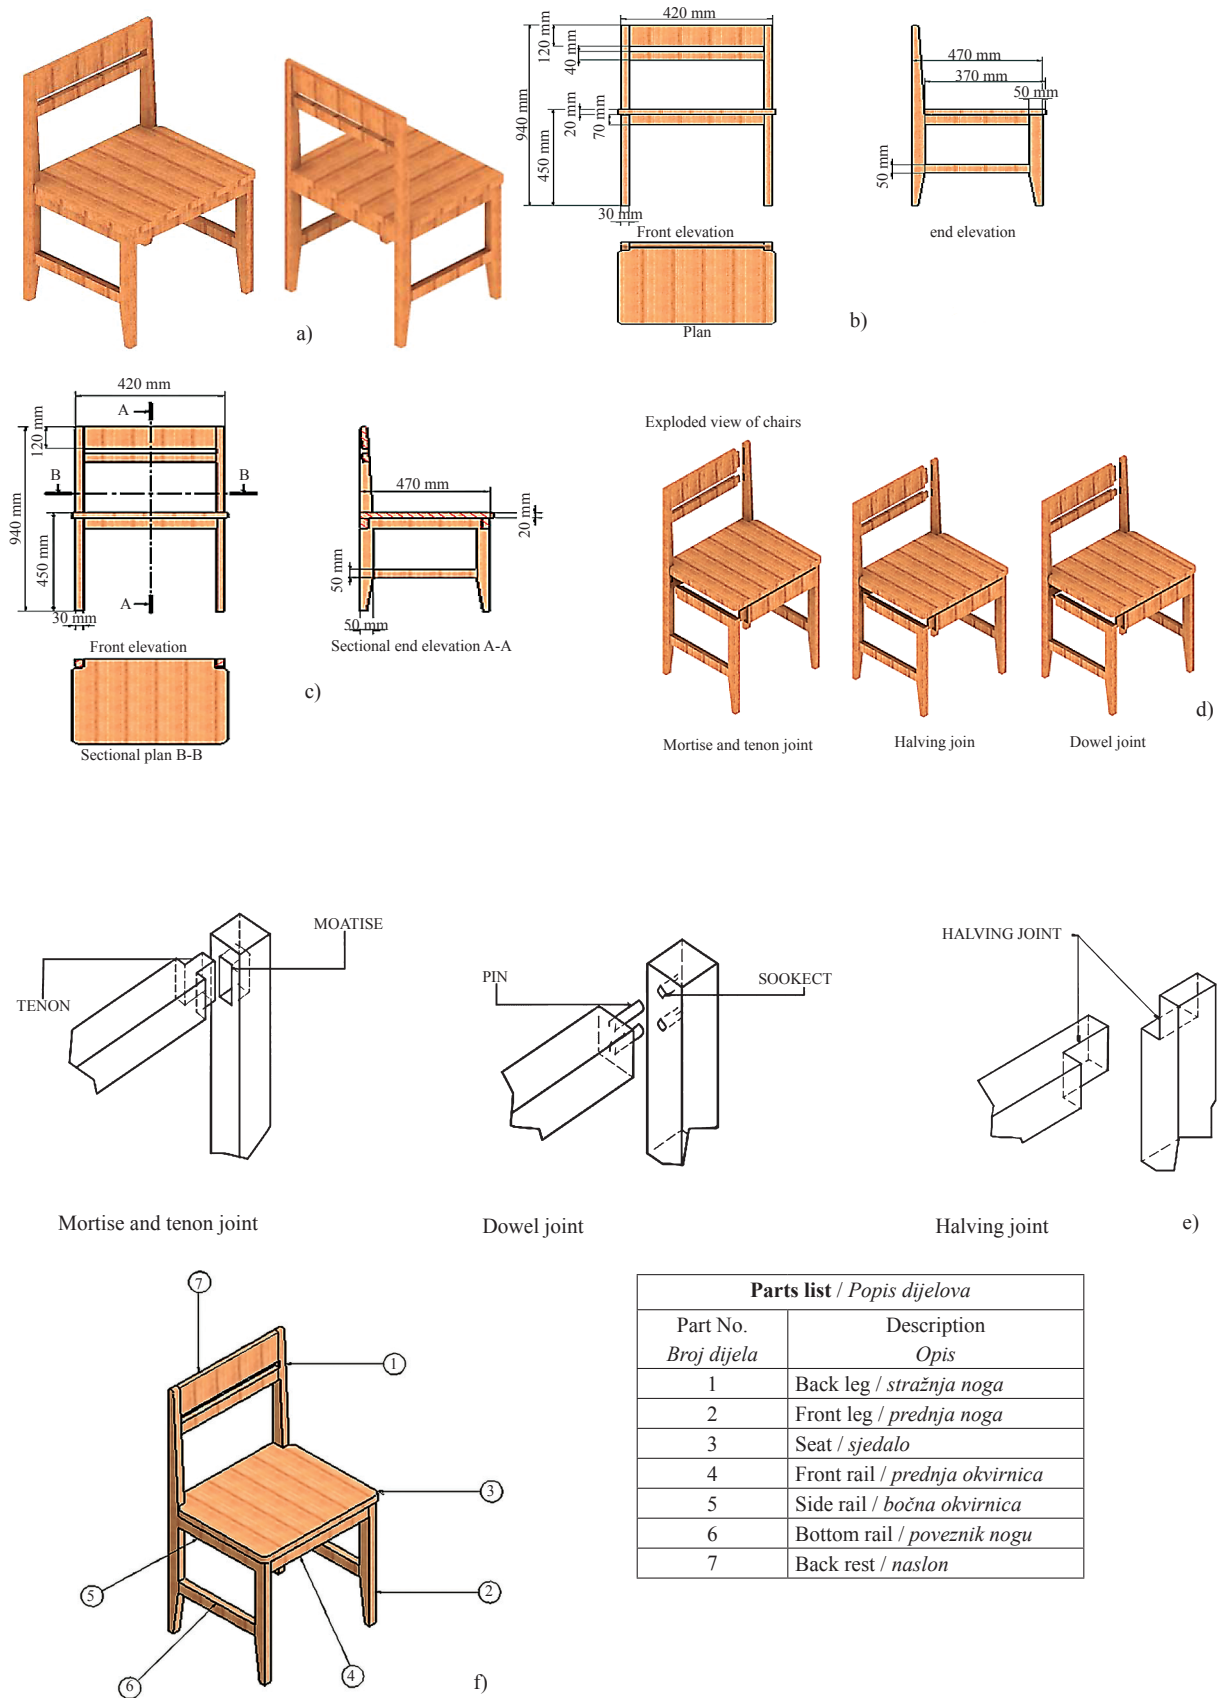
Working drawings of the coco wood chair components: a) isometric view, b) orthographic view, c) sectional view, d) exploded view, e) details of joint construction, f) parts list
